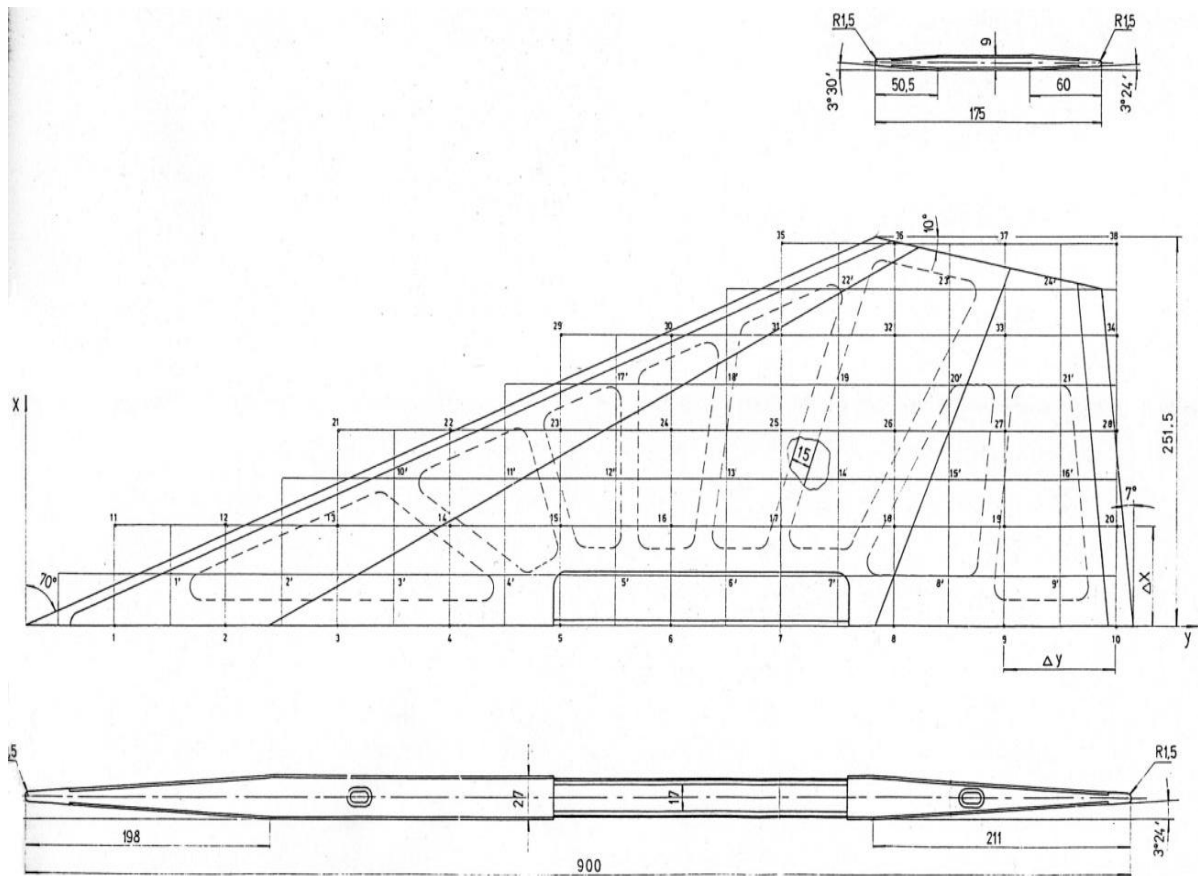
Model Geometry with Mesh of Bearing Surface
